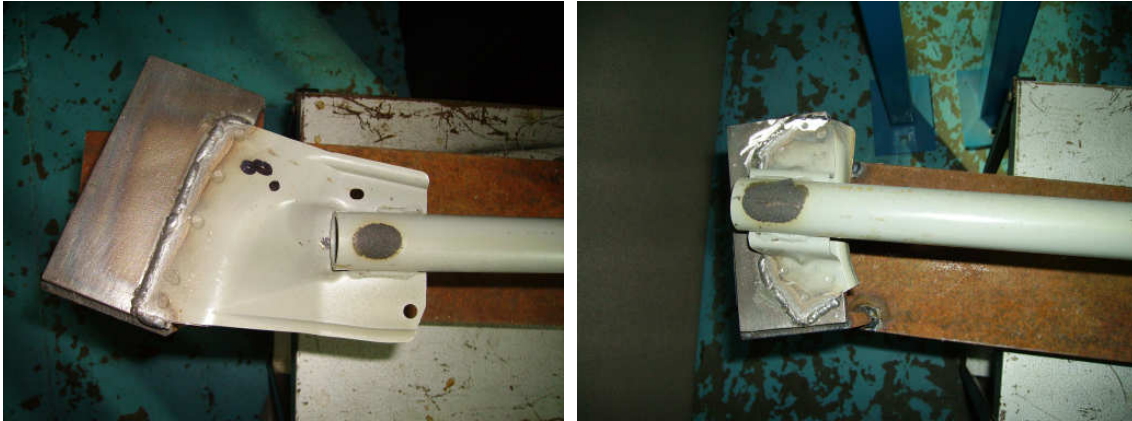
big bracket (left) and small bracket (right) welded along their edges on two plates 12mm thick.
